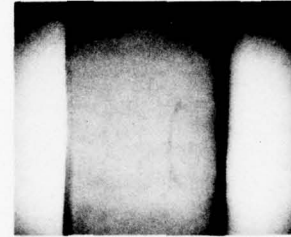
Test piece fracture surface and edge shot radiograph of typical intermittent LOF defects in 3/8-in. (9.6-mm) thick 5083/5183 Aluminum welds.
